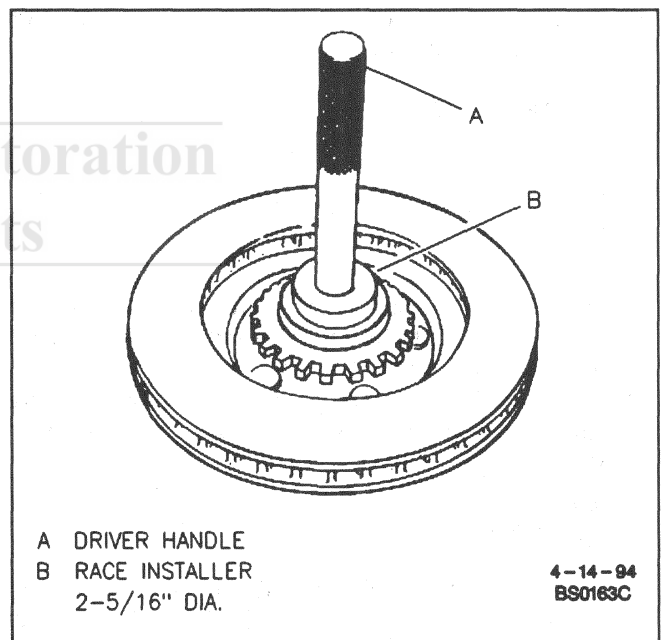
Installing Front Wheel Inner Bearing Outer Race
